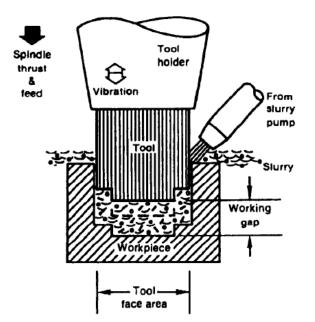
Schematic Illustration of Ultrasonic Machining [1]
